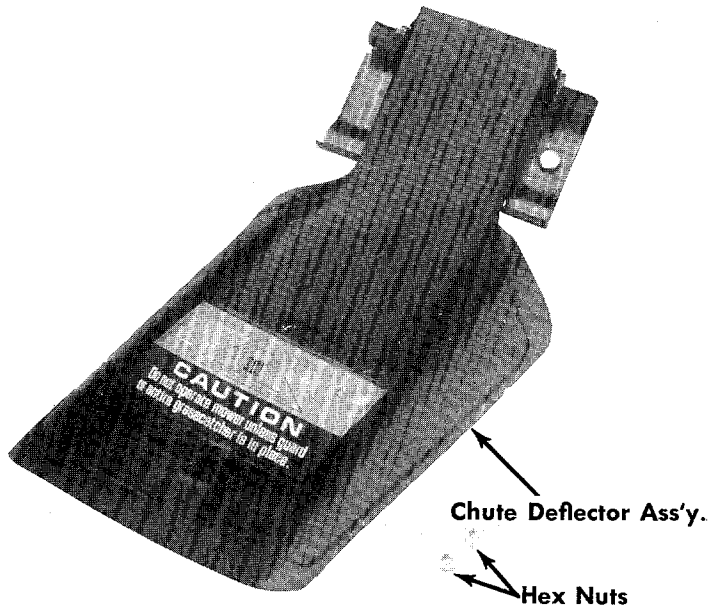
CHUTE DEFLECTOR ASSEMBLY
